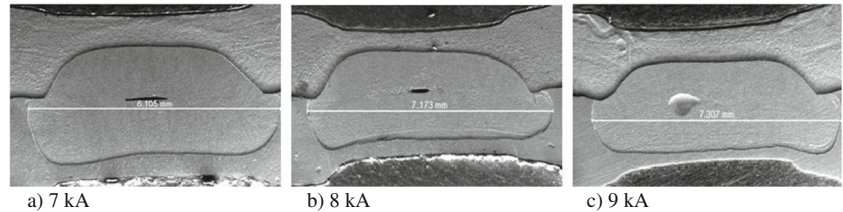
Diameter increment of dissimilar (mild + stainless) steel (welding current increments). a 7 kA, b 8 kA, c 9 kA
